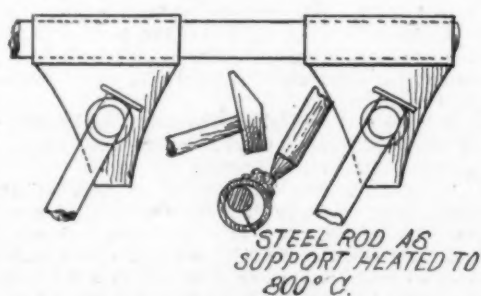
Manufacture of seamless nickel tubing by autogenous welding.
